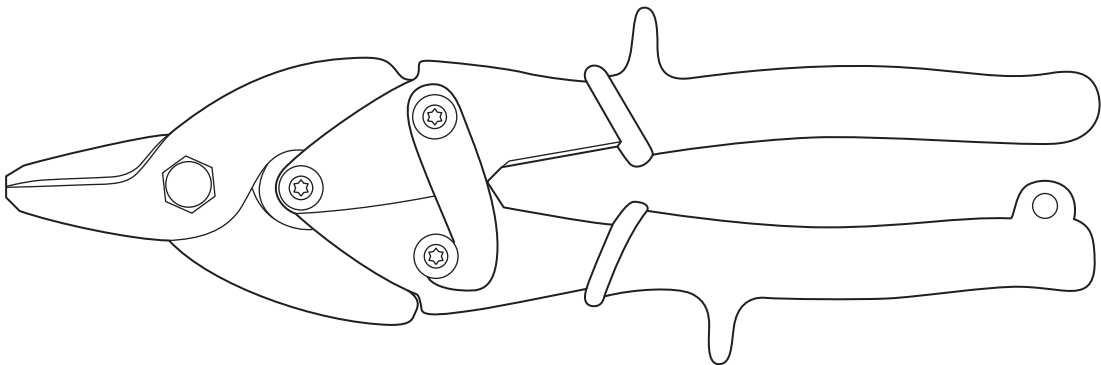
Type II, Class 1, Straight Cutting Style C Long Cut
